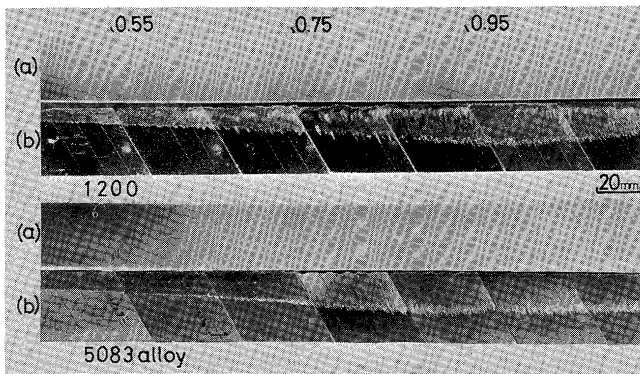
Radiographs and macrostructures in the longitudinal section of aluminum alloy beam welds.
